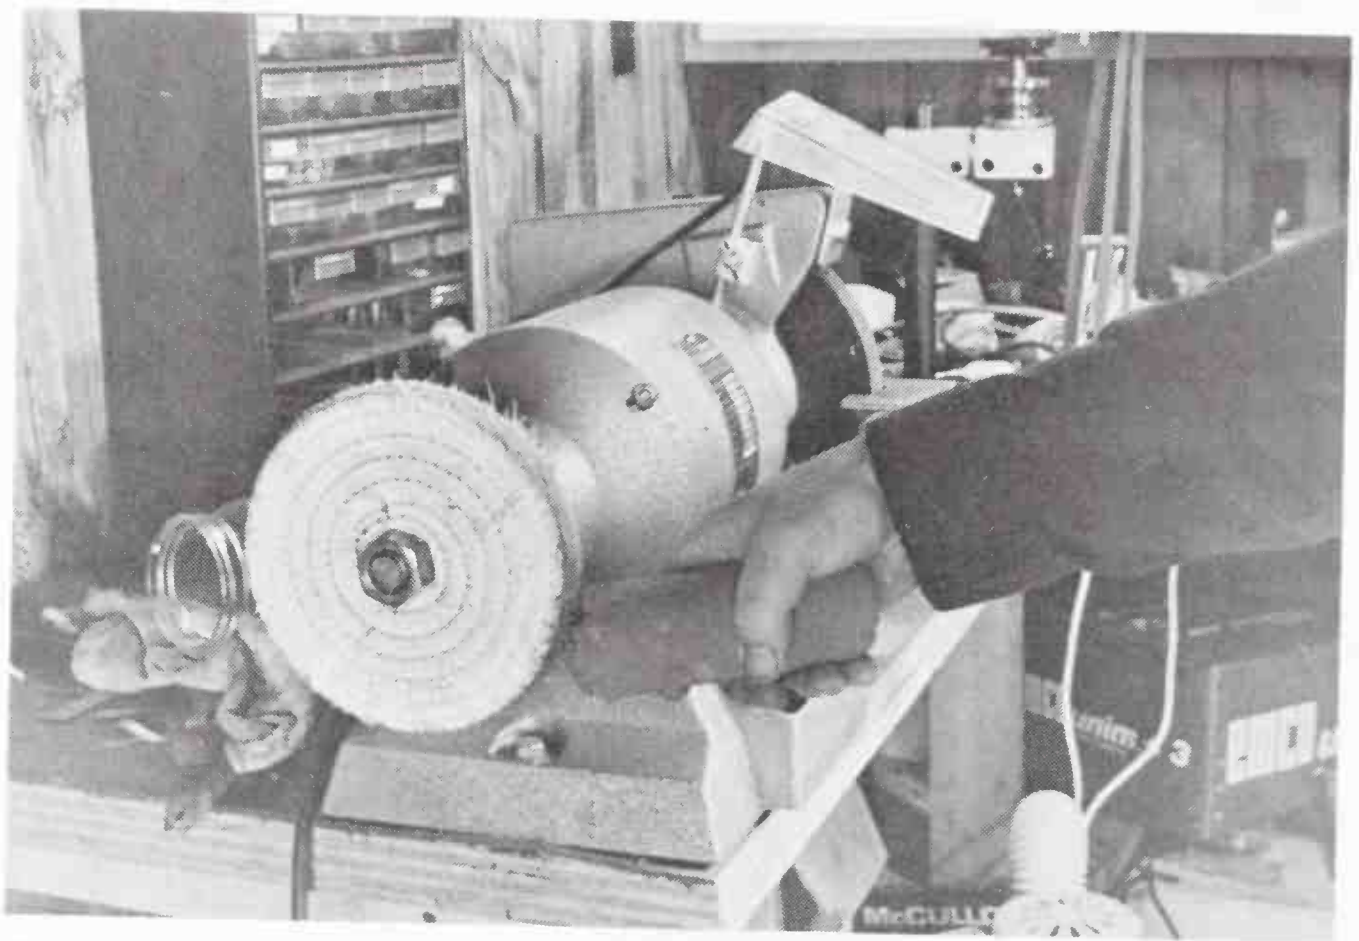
One of the grinding wheels has been removed from this bench grinder to convert it to a polisher.
